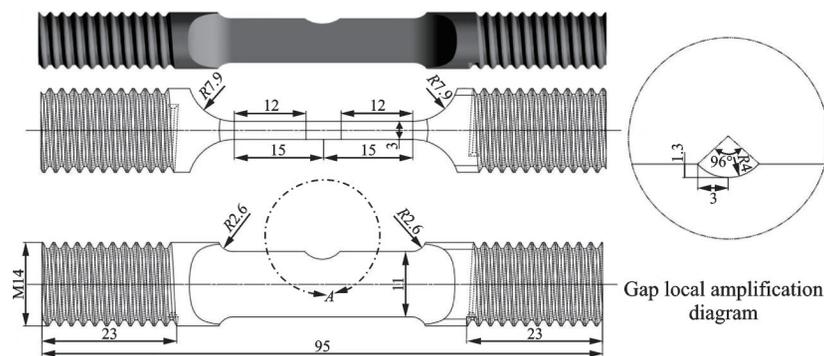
Specimen shape and dimension drawing and some processed test pieces (Unit: mm)
